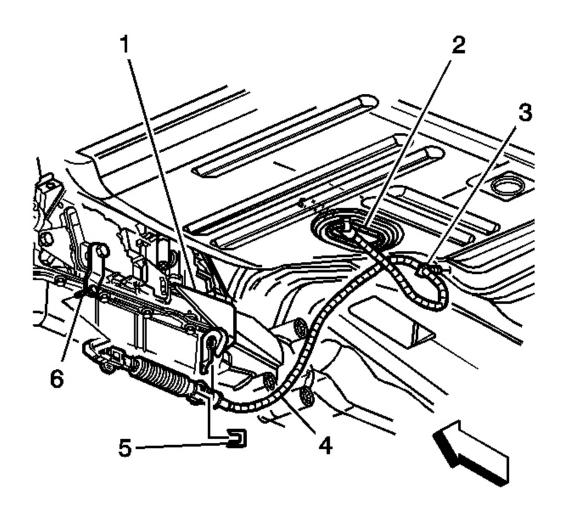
Identifying Range Selector Cable & Components Courtesy of GENERAL MOTORS CORP.
